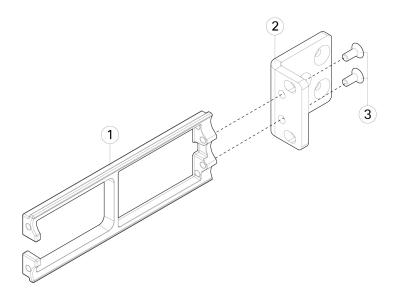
Attach the Rack-Mount Bracket to the Side of the Chassis
